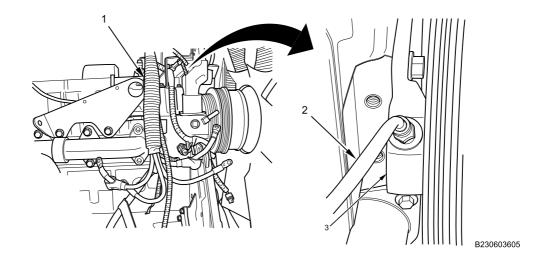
Engine Wiring Harness and Fan Drive Assembly Air Line. (Alternator Removed for Clarity).
